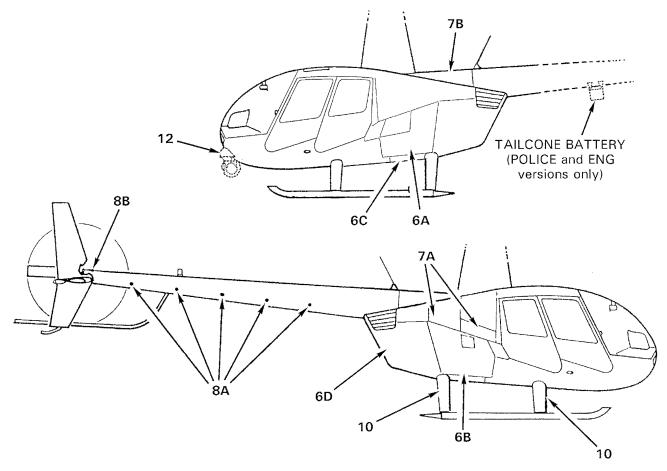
A ACCESS AND INSPECTION PANELS
